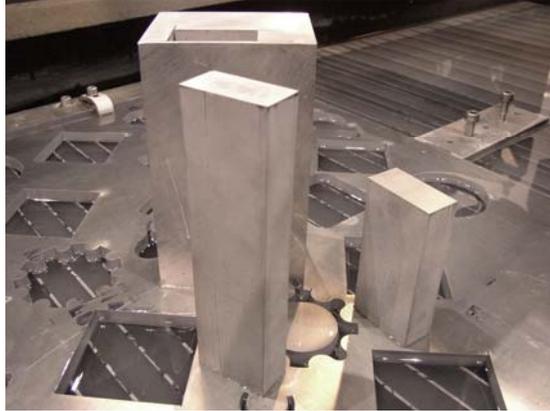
A 20 cm (eight inch) thick aluminum rectangle machined using corner passing to improve the quality of the outside corner, while simultaneously speeding up part cutting significantly
